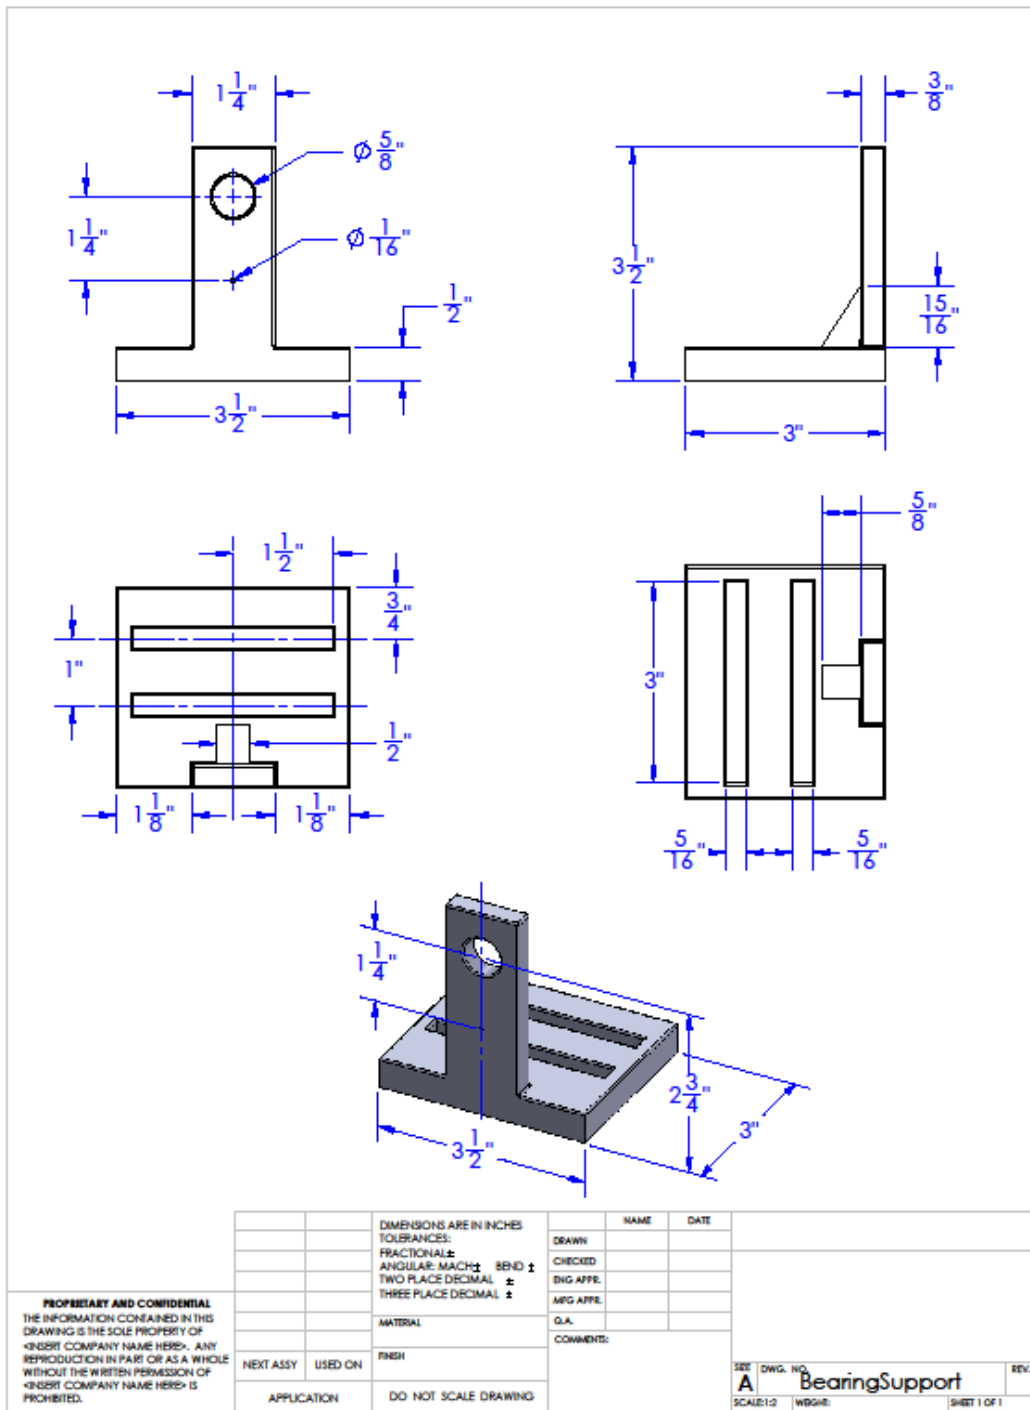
Bearing support. A small skateboard wheel bearing was press fitted into the hole on the upright member. The cylindrical boss of the rocker was then inserted through the bearing. A metallic lock washer and threaded nut were used to secure the rocker to the bearing support. The 3D printer material used for fabrication was both soft and strong enough so that the nut was able to thread the boss.
